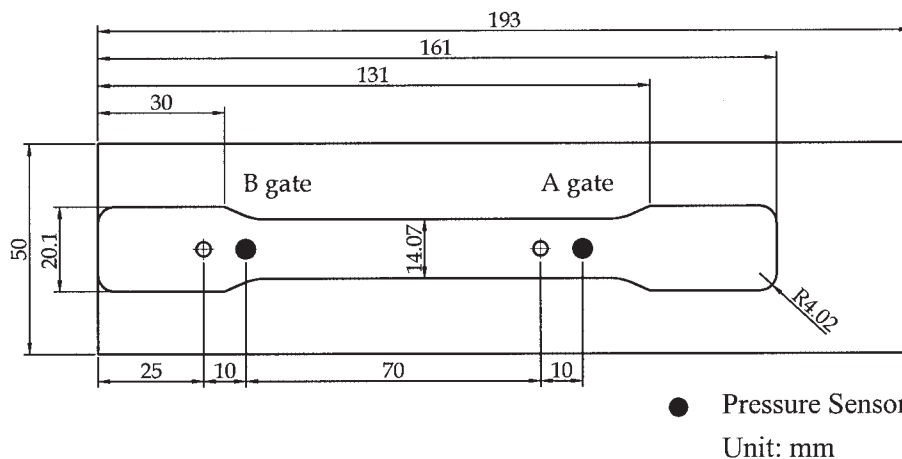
Schematic of the cavity dimensions and two pressure sensors flush-mounted near each valve gate. The shape and dimensions of the tensile test specimen are also identified.
